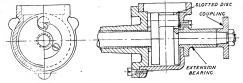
Extension bearing fitted to take auxiliary or "follower" shaft
